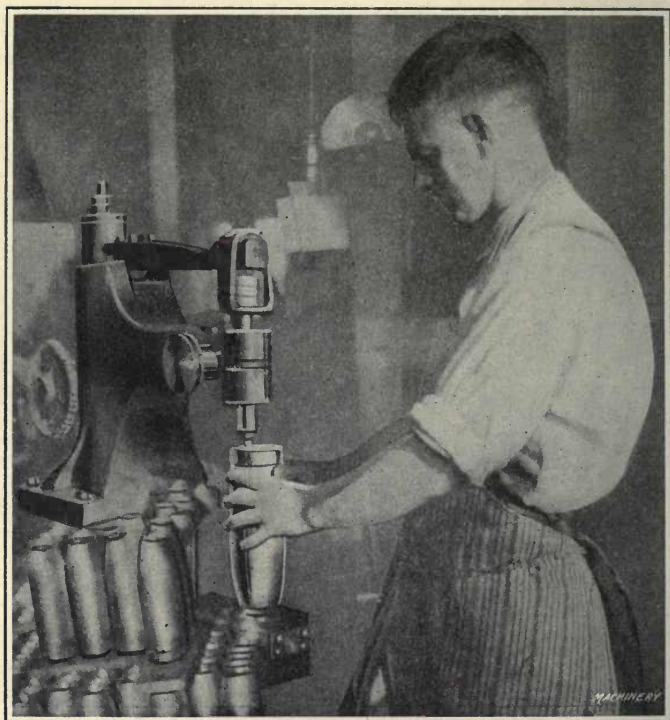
Riveting in the Gas Plug in a "High-Speed" Hammer
